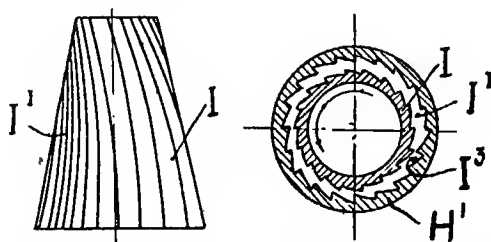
B.—Essential parts of the Guiguet "Agglomerator" (H Fig. 2 A.)
